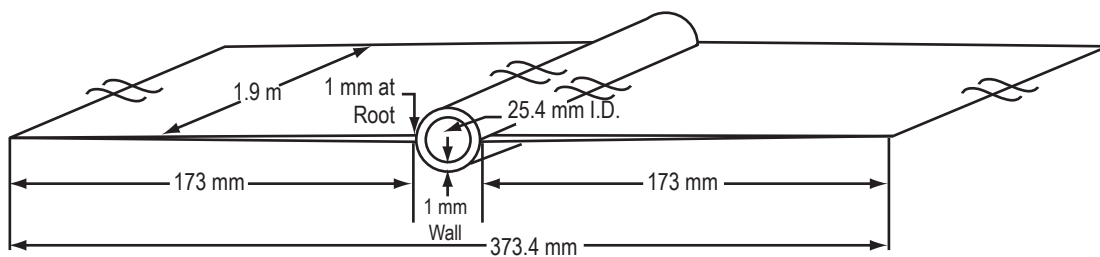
Specified configuration of the jacket and fin assembly for the prototype composite heat pipe/fin radiating element. This jacket will surround a 25.4-mm OD × 2.5-mm wall thickness × 220-cm length welded Ti tube that serves as a simulated heat pipe.
